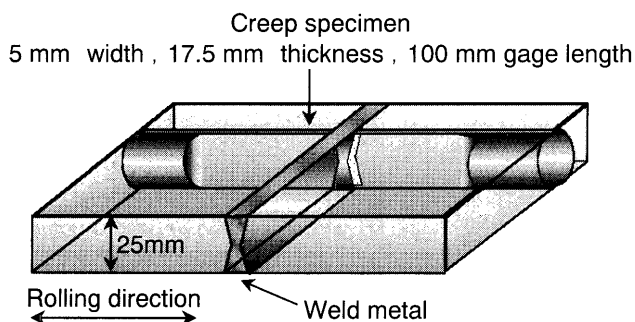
Sampling of test specimen from the welded joint.
